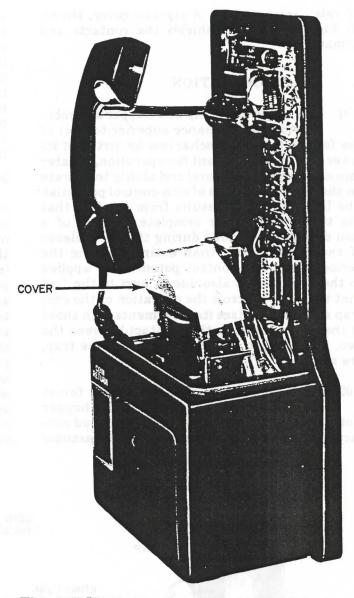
Lower Housing Assembly, LPC-Series Prepay Coin Telephone Set.
